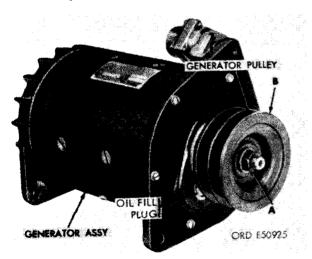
REMOVING OR INSTALLING GENERATOR PULLEY.
